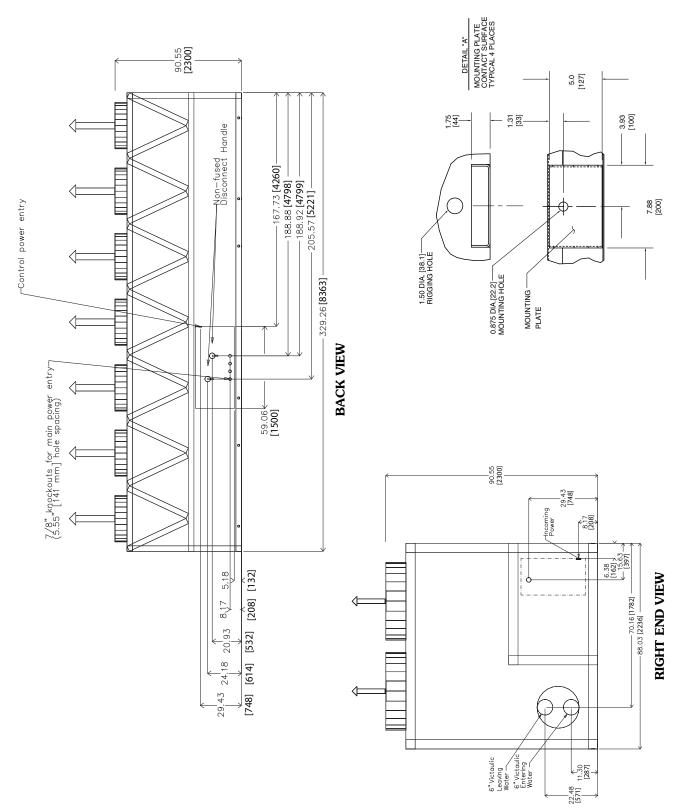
30XA220,240 Air-Cooled Liquid Chiller Dimensions (cont)
